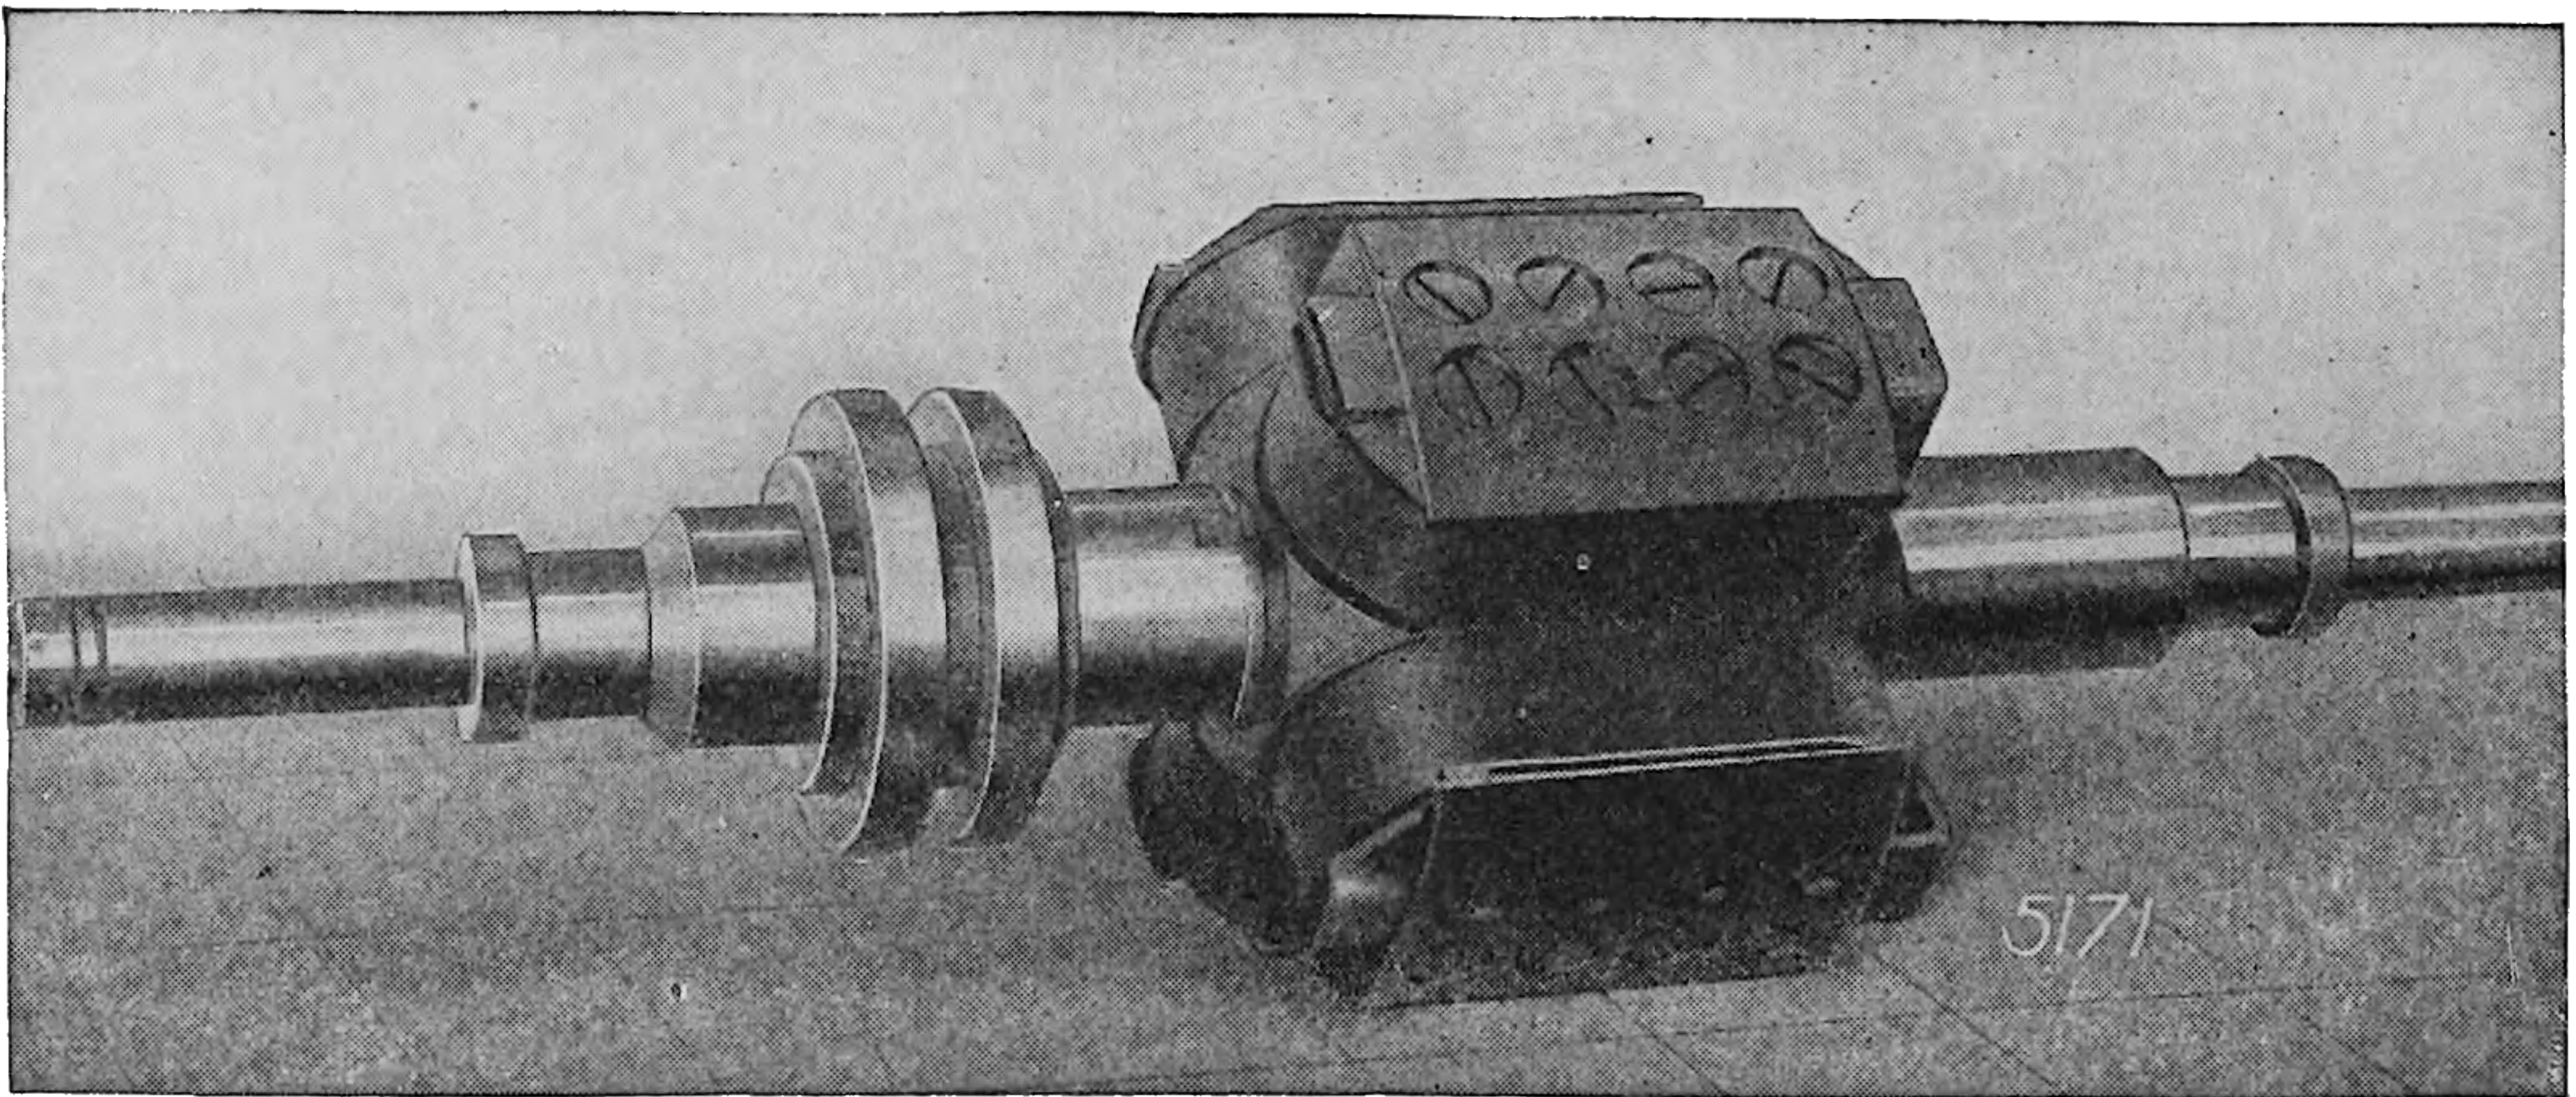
Rotor of 250 K. V. A. Two-Phase Crocker-Wheeler Turboalternator
